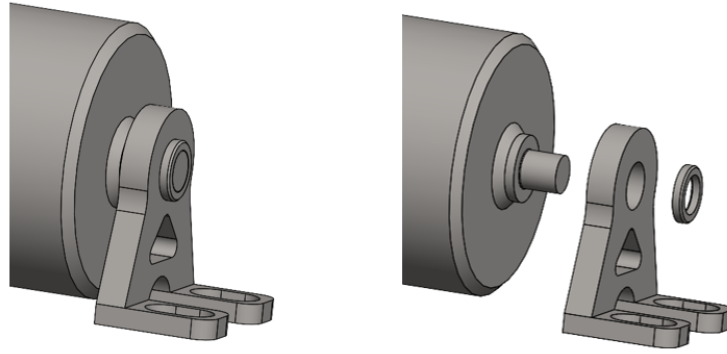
Isometric View and Exploded View of a Representation of the Accumulator Support Structure Connection.
